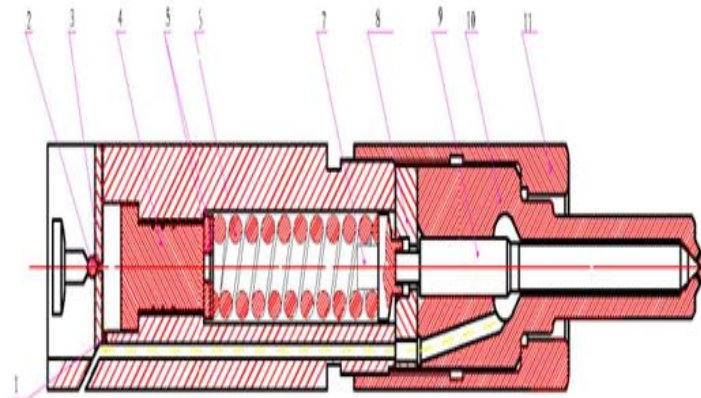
The structural drawing of an injector 1-orifice of oil feeding 2-sealing ball valve 3-orifice of oil return 4-control piston 5-adjust shim 6- press-adjusting spring 7-tappet 8-combining seat 9-needle valve 10-needle-valve body 11-nozzle nut
